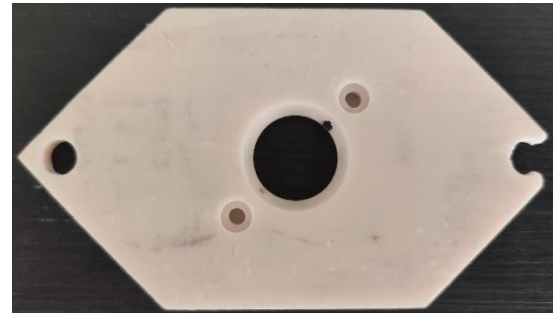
Backplate prototype III: Bottom, with new inner mounting holes and chamfered middle hole. One side broke off during mounting due to tight tolerances.
